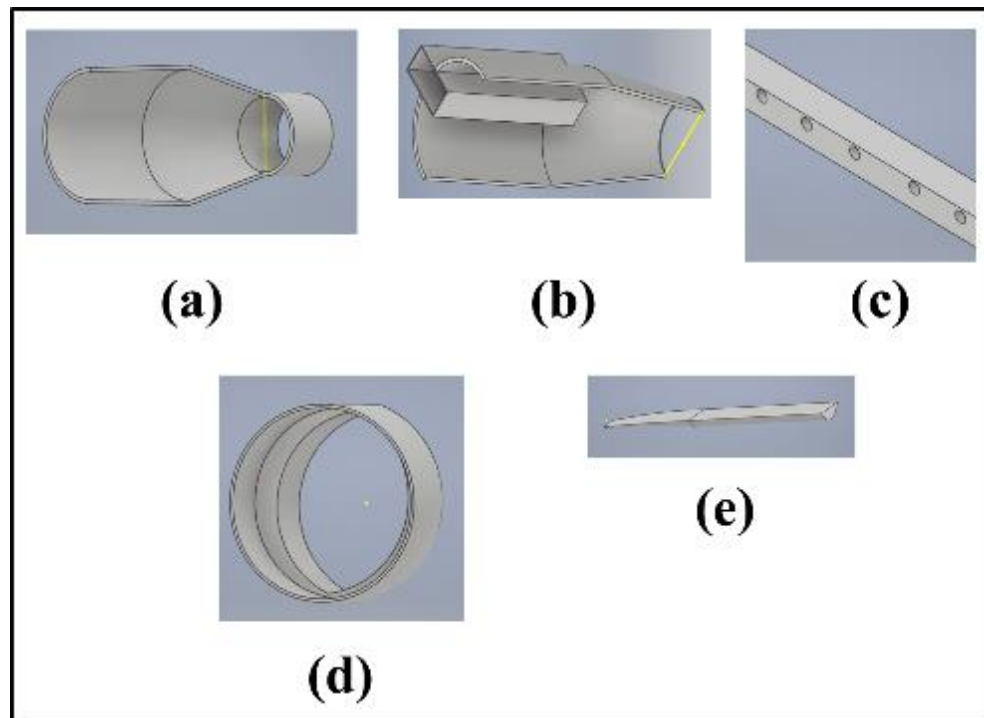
(a) Forearm (b) Forearm Cover (c) Fishing Lines Guide (d) Side Support (e) Side Support.
